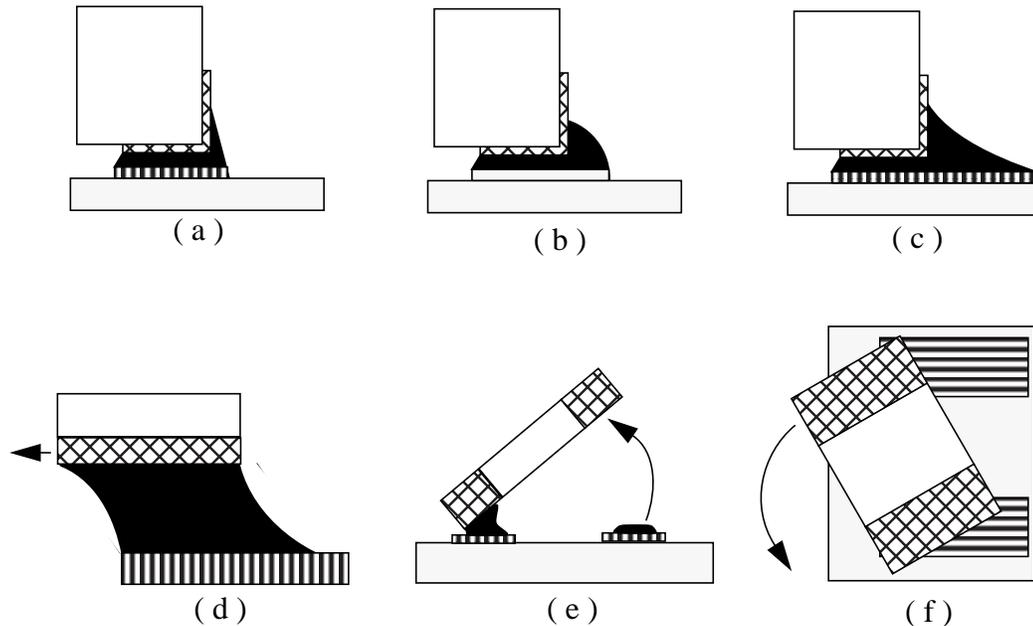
Taxonomy of solder joint variations: (a) insufficient solder; (b) optimal solder; (c) excessive solder; (d) mis-alignment; (e) tone-stone effect; (f) swimming.
